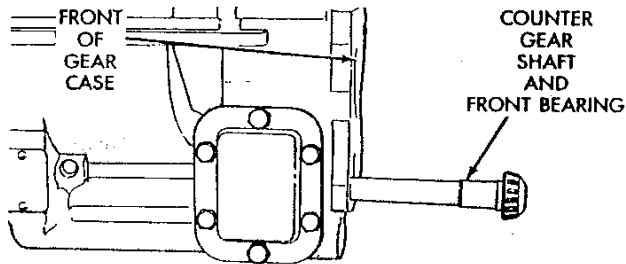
Counter Gear Shaft And Front Bearing Removal
